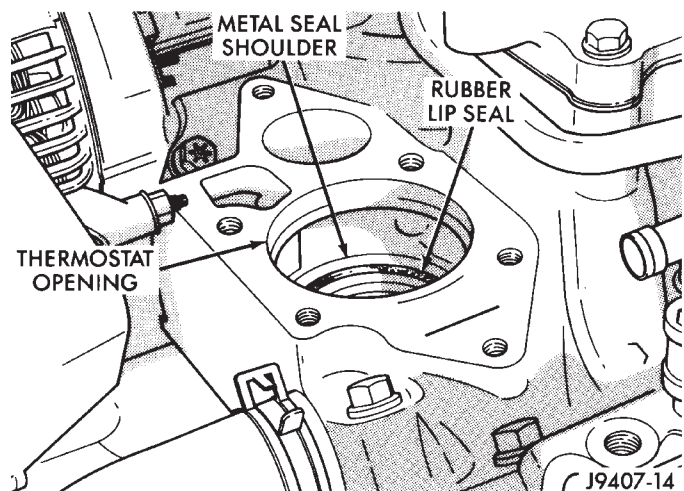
Thermostat Seal—8.0L V-10 Engine
